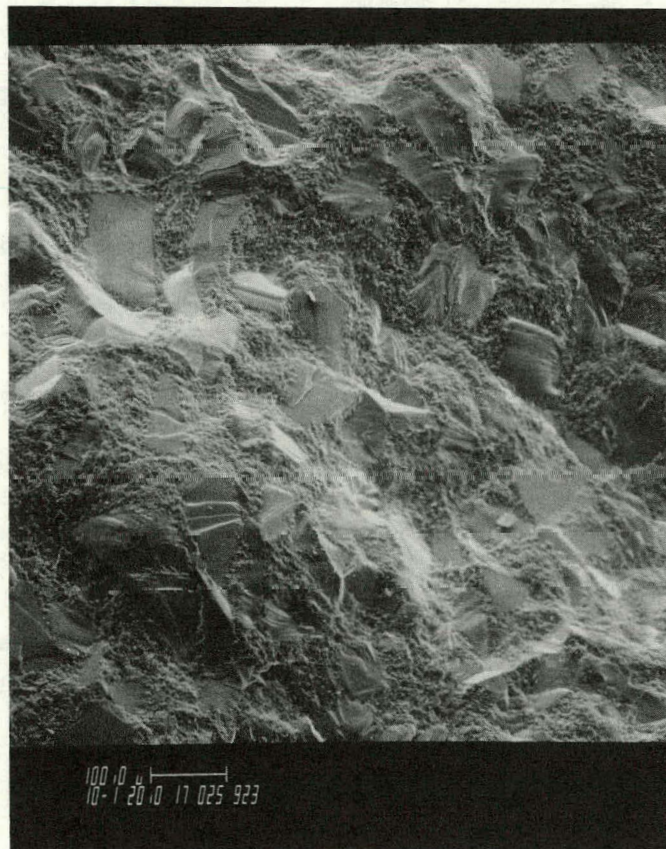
Tube Fracture Surface, Low Magnification
